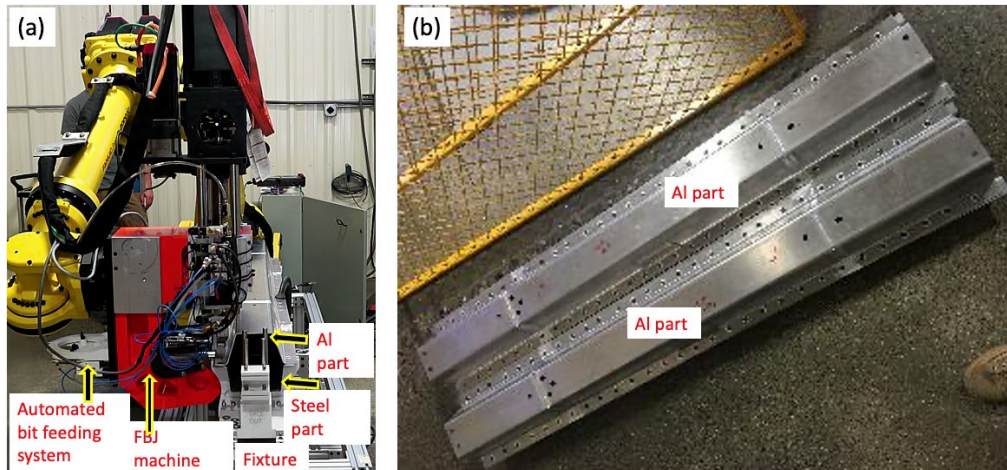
(a) Welding head on Fanuc robot and work cell fixtures at Mazak MegaStir for multiple spot welding of component Al-steel parts. (b) Demonstrated prototype part 1150 mm long. Source: ORNL.
